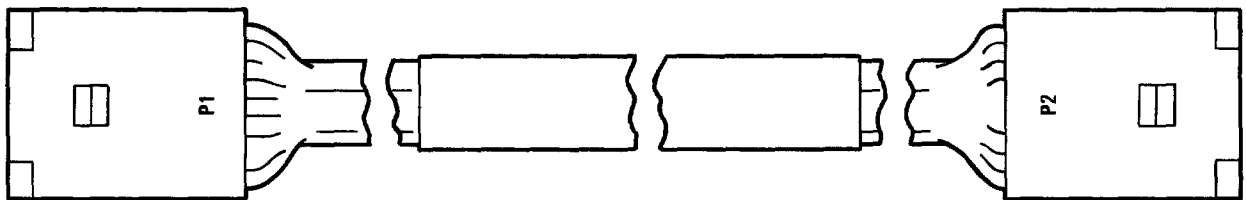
CASE ASSEMBLY (SHEET 1 OF 4)
